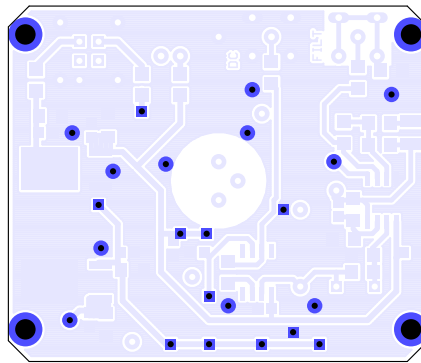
Board bottom view showing connectors, test points, vias and wired components
